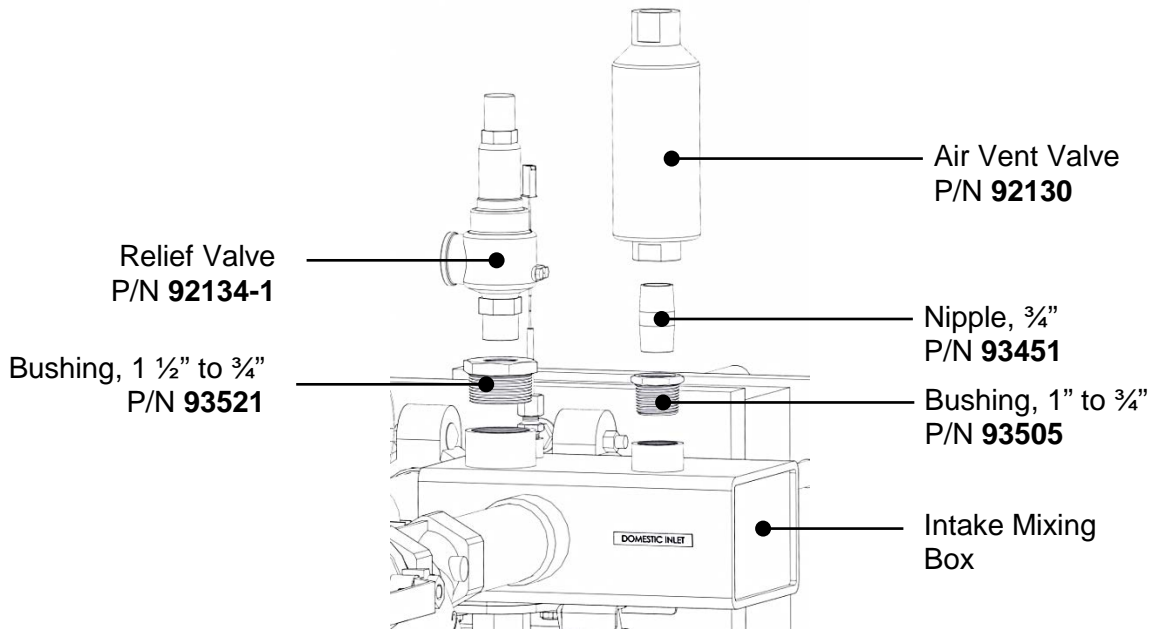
Relief Valve and Air Vent Valve Installation – 200 PSI – Exploded
